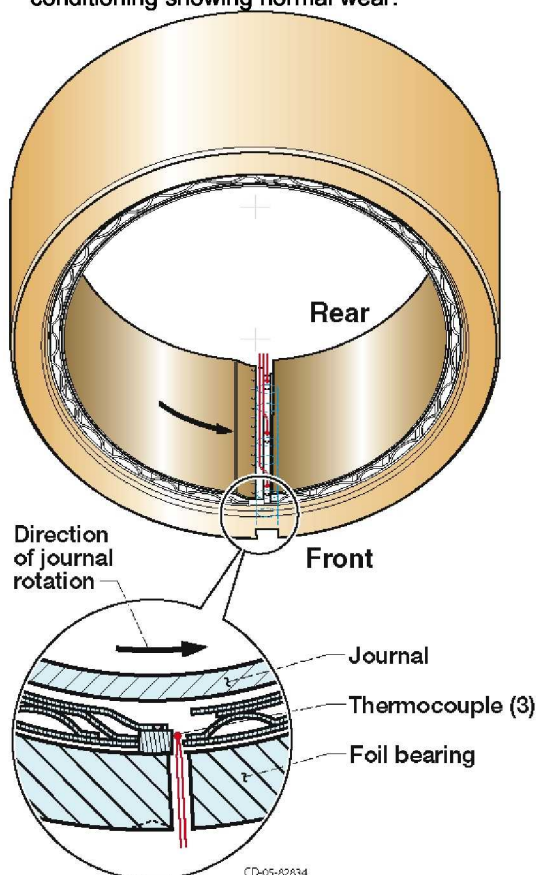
Schematic showing the thermocouple location inside the test bearing.
